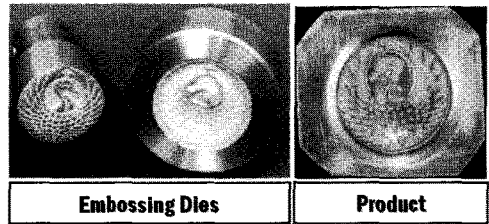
Applications of SLS process to manufacturing of sheet metal forming tools (Nanyang Technical University, Singapore)³²
